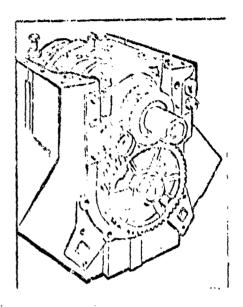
Checking clearance in the gas distribution gear teeth engagement
